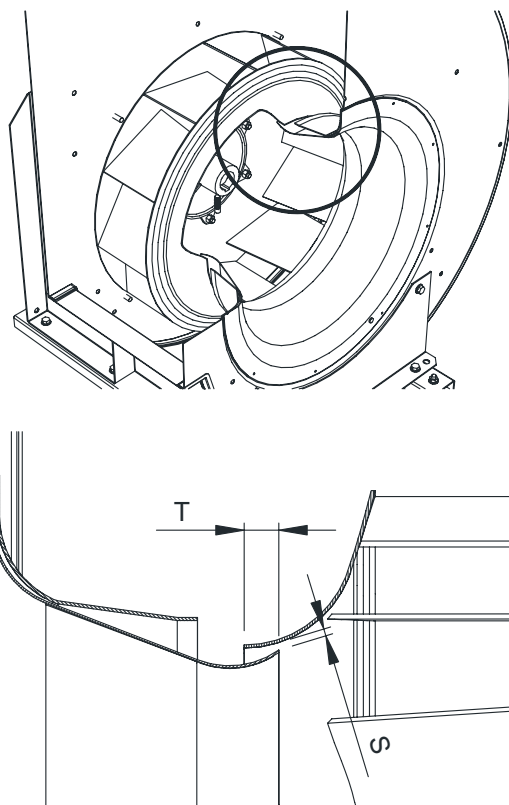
Assembly of the LB and HB impeller and the inlet cone. Measurements S and T should be as equal as possible the whole way.
